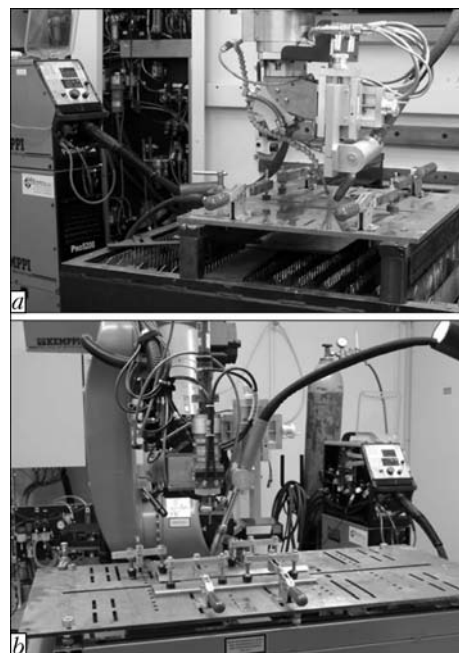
Stations for testing hybrid processes: *a* — test station for hybrid CO₂ laser + TIG/MIG welding (system with laser cell TLC 1005, 3800 W, $f = 270$ mm and MAG/MIG Kemppi Pro Evolution); *b* — test station for hybrid YAG laser + TIG/MIG welding (system with YAG laser HL 2006D/LCU, 2000 W, $f = 200$ mm and MAG/MIG Kemppi Pro Evolution)
